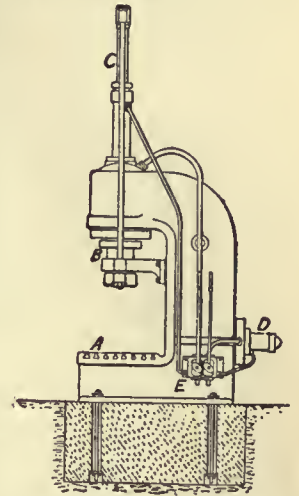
Hydraulic Forging Press. (Fielding & Platt, Ltd., Gloucester.)
